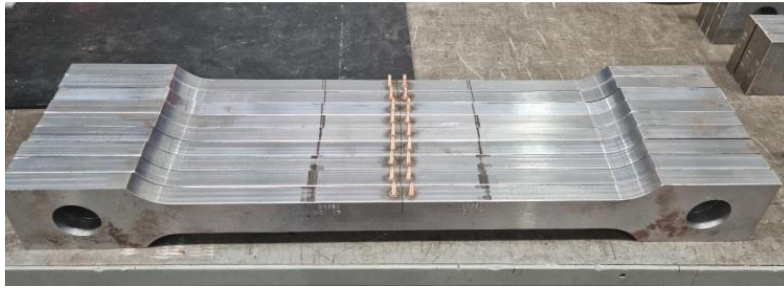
Pin-loaded SENT specimens' configuration to be tested using single point unloading method
